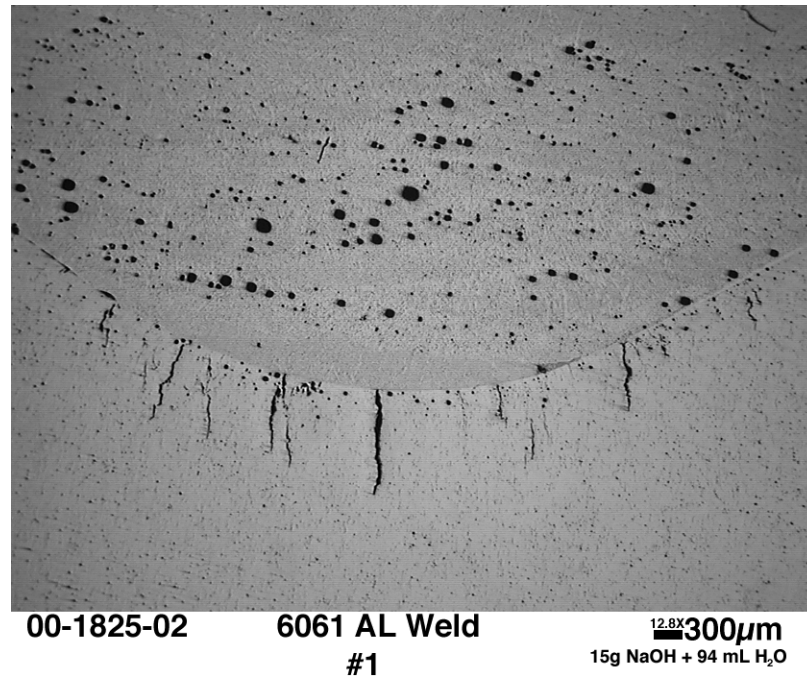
Standard 6061 aluminum engine head weld repair technique with 4043 filler metal contained fusion line cracking and scattered porosity.
